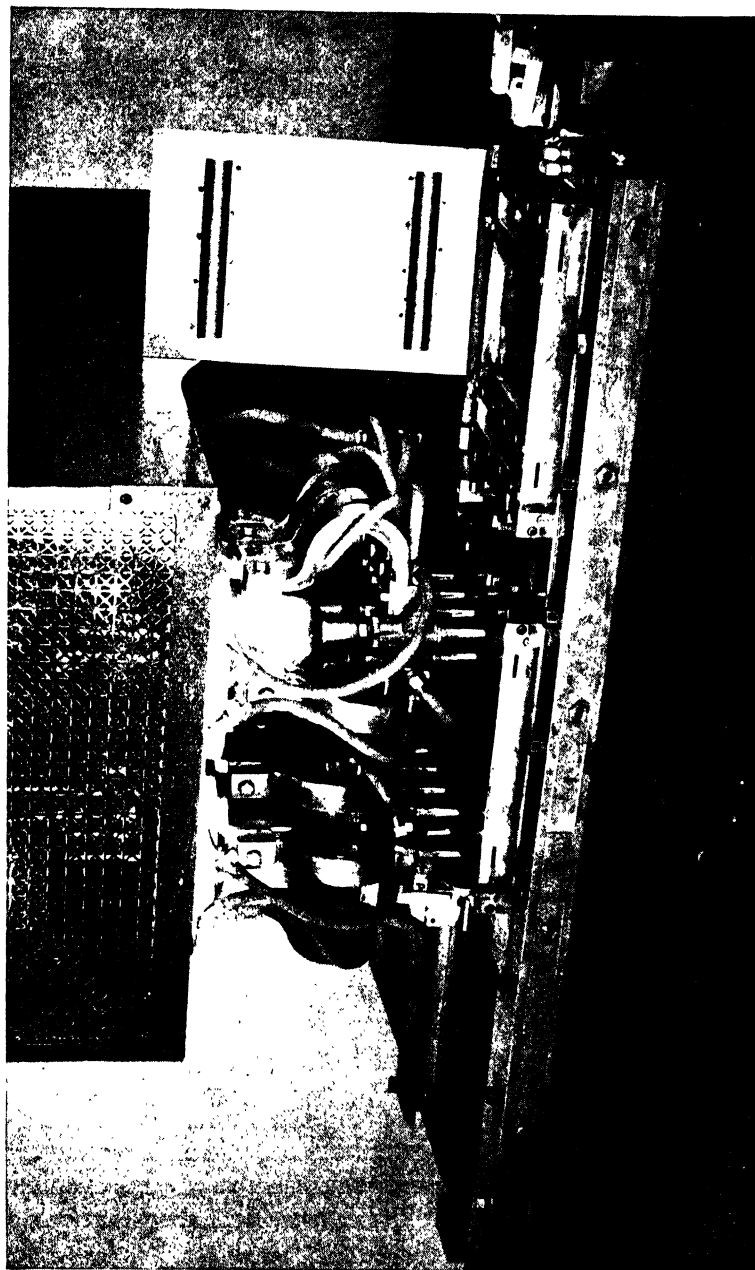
PLATE X.—A high-speed spot-welding fixture. Hydromatic welding machine with a two-station automatic fixture for spot-welding and assembling ammunition box ends. Sixteen spot welds are made simultaneously. (Courtesy of *Progressive Welder Company*.)
